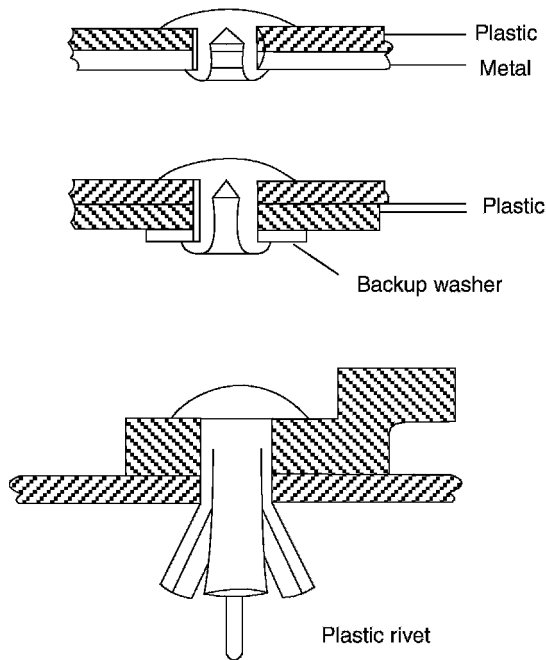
Riveted plastic assembly. (From Ref. 12.)
